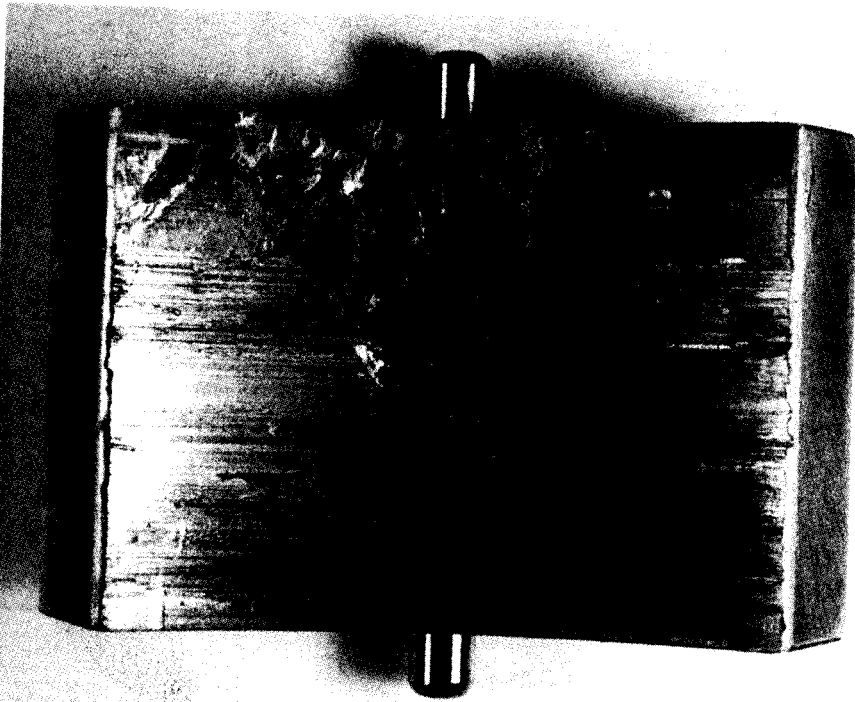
Babbitt fatigue from vibration of journal close to bearing surface. Courtesy Kingsbury, Inc.
